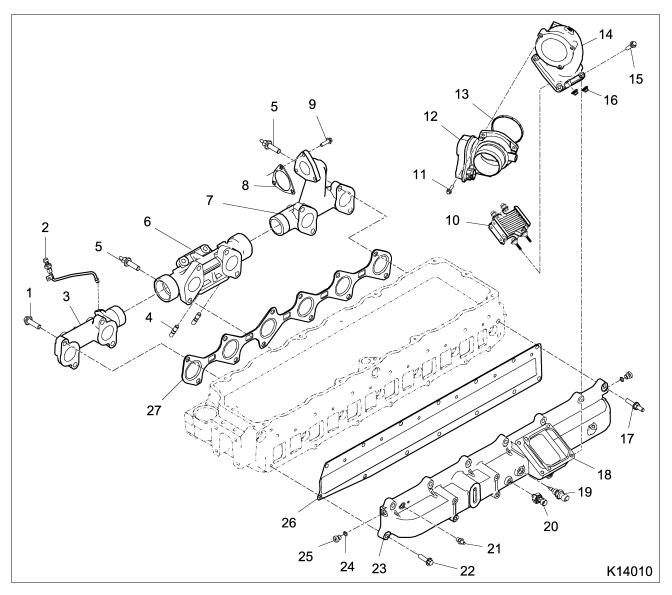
Intake manifold, EGR and inlet air mixer, and exhaust manifold assemblies
